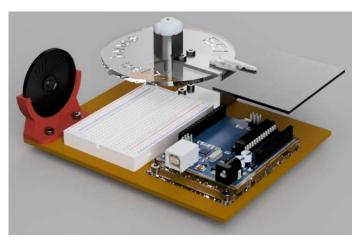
Rendered design of the base and component mounts, that students manufacture for themselves. Includes laser cut wood and plastic (after adapting relevant CAD designs) and a 3D printed speaker holder.
